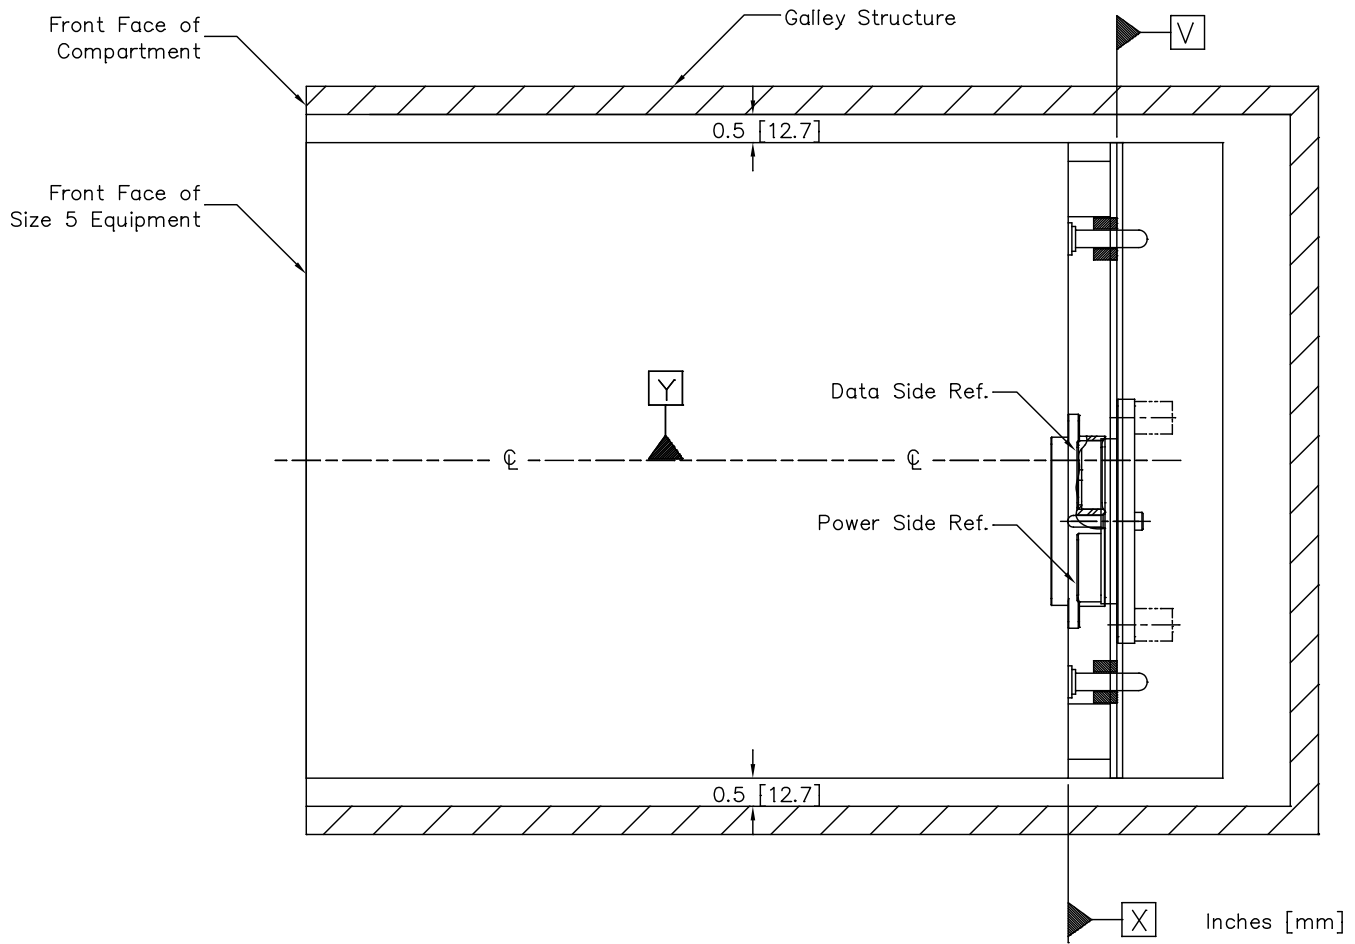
C – GAIN Size 5 Compartment and Equipment Installation Details
